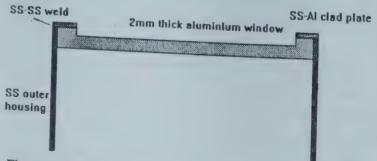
Schematic diagram of the welding detail of the SS-Al clad plate used as end window for thickness gauging ion
